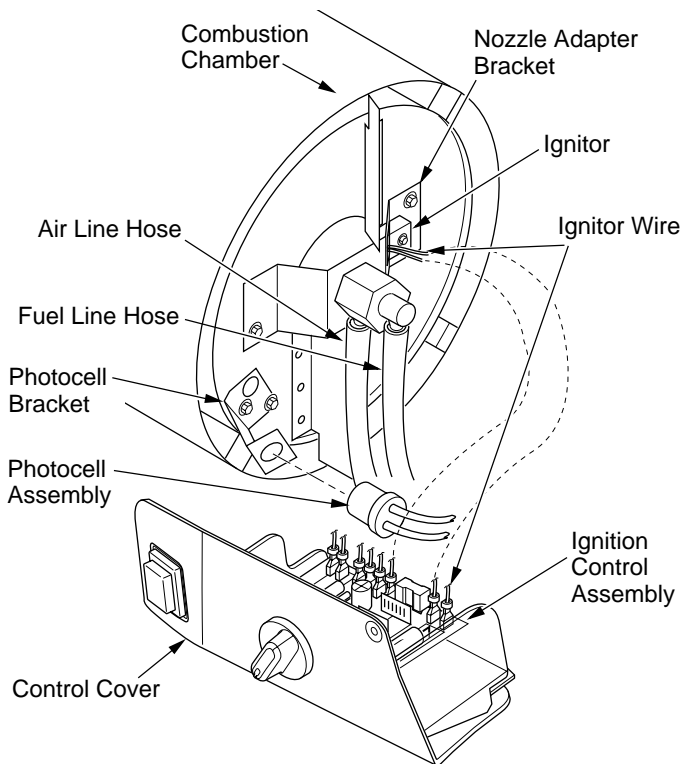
Disconnecting Ignitor Wires from Ignition Control Assembly (125T, 170T Model Shown)
